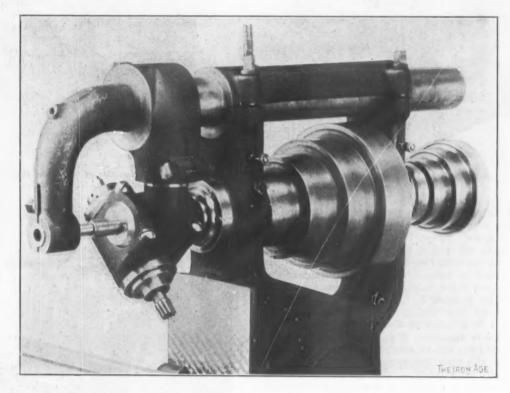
The No. 1 Vertical Milling Attachment Made by the Fox Machine Company.
